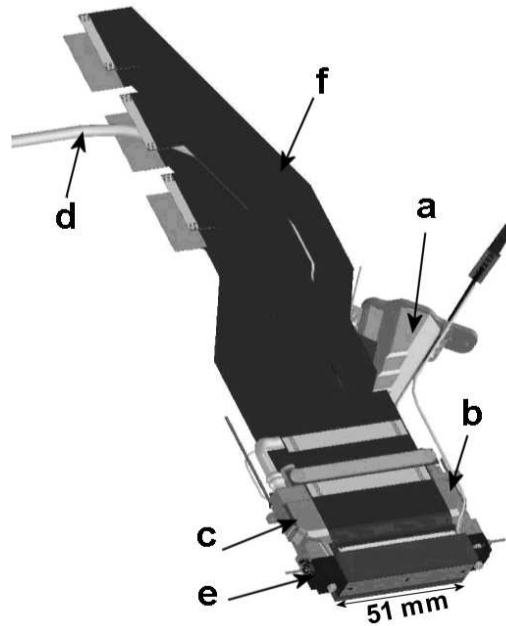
3D CAD drawing of a printhead prototype showing (a) the melting unit, (b) the filter units, (c) the reservoir, (d) the static pressure hose, (e) the central part, and (f) the electronic driving supply.
